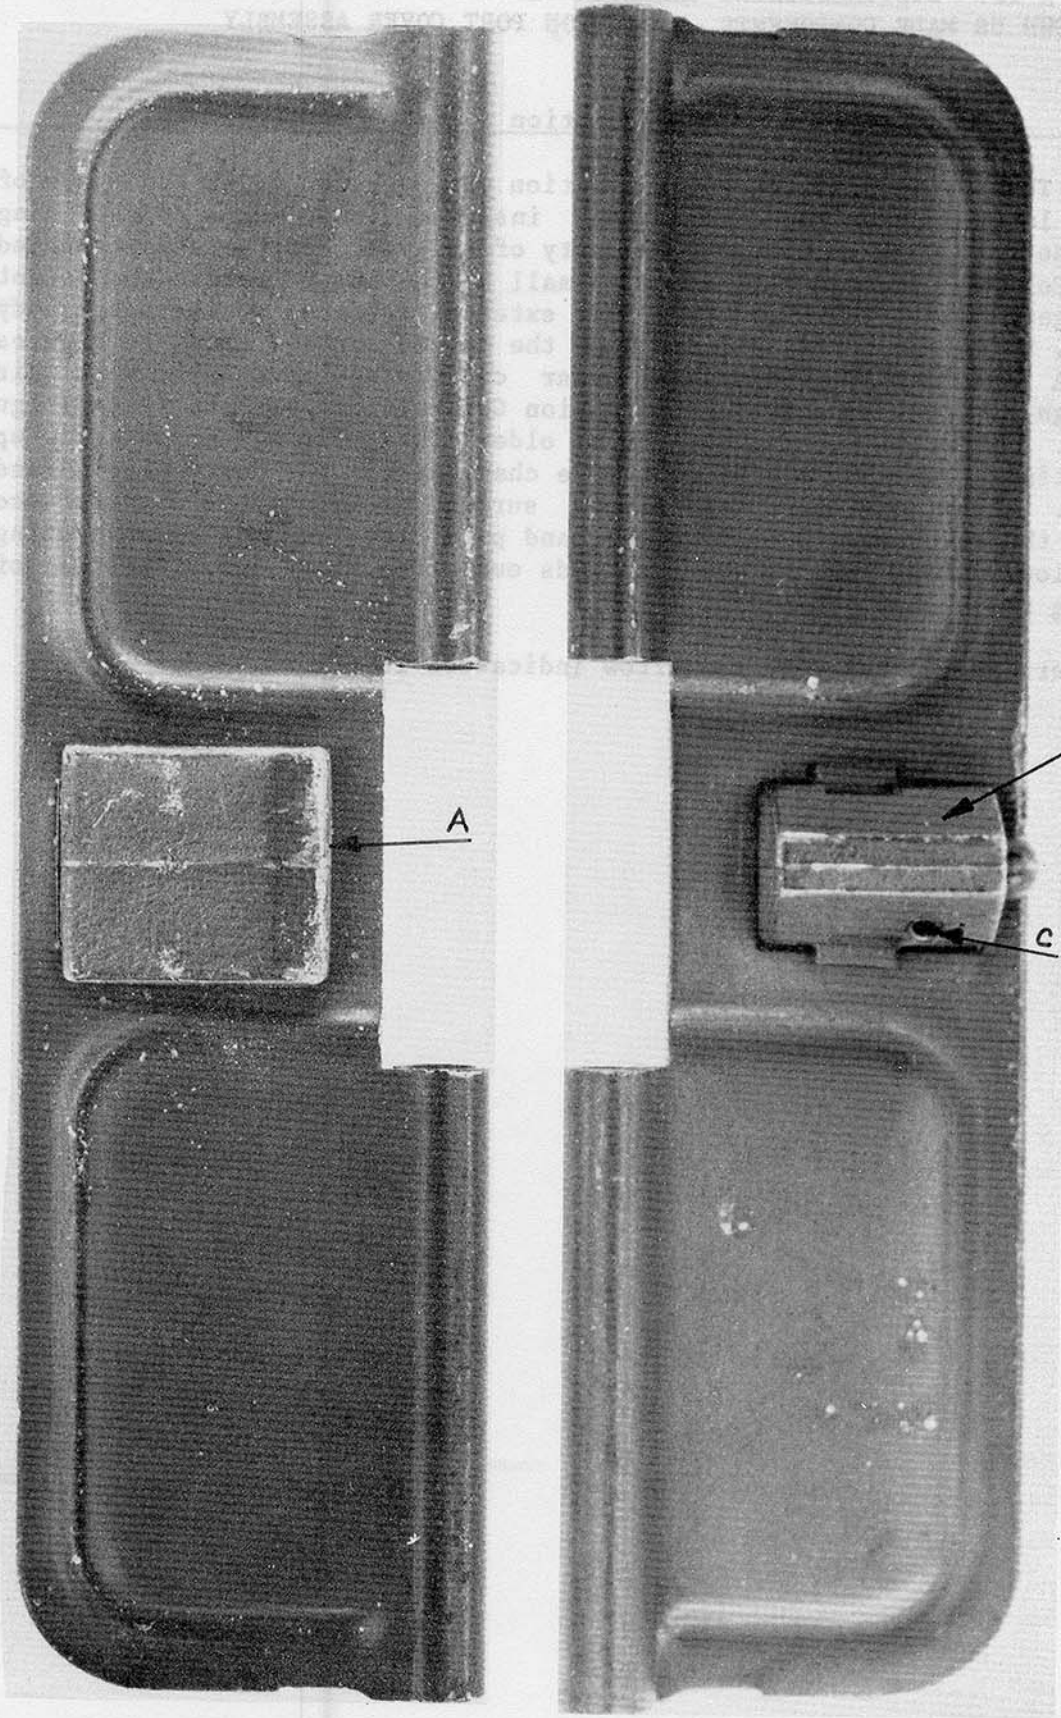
Test rifle ejection port cover assembly. Outside view at top, inside view at bottom.
